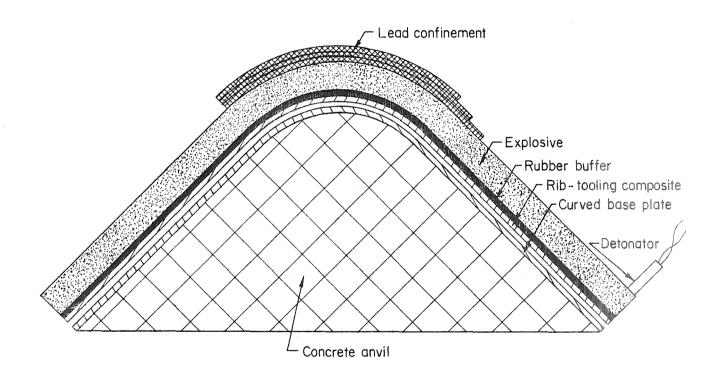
SETUP FOR EXPLOSIVELY WELDING RIBS TO A CURVED STAINLESS STEEL PLATE USING CONFINEMENT OF EXPLOSIVE OVER CURVED PORTION OF SPECIMEN
